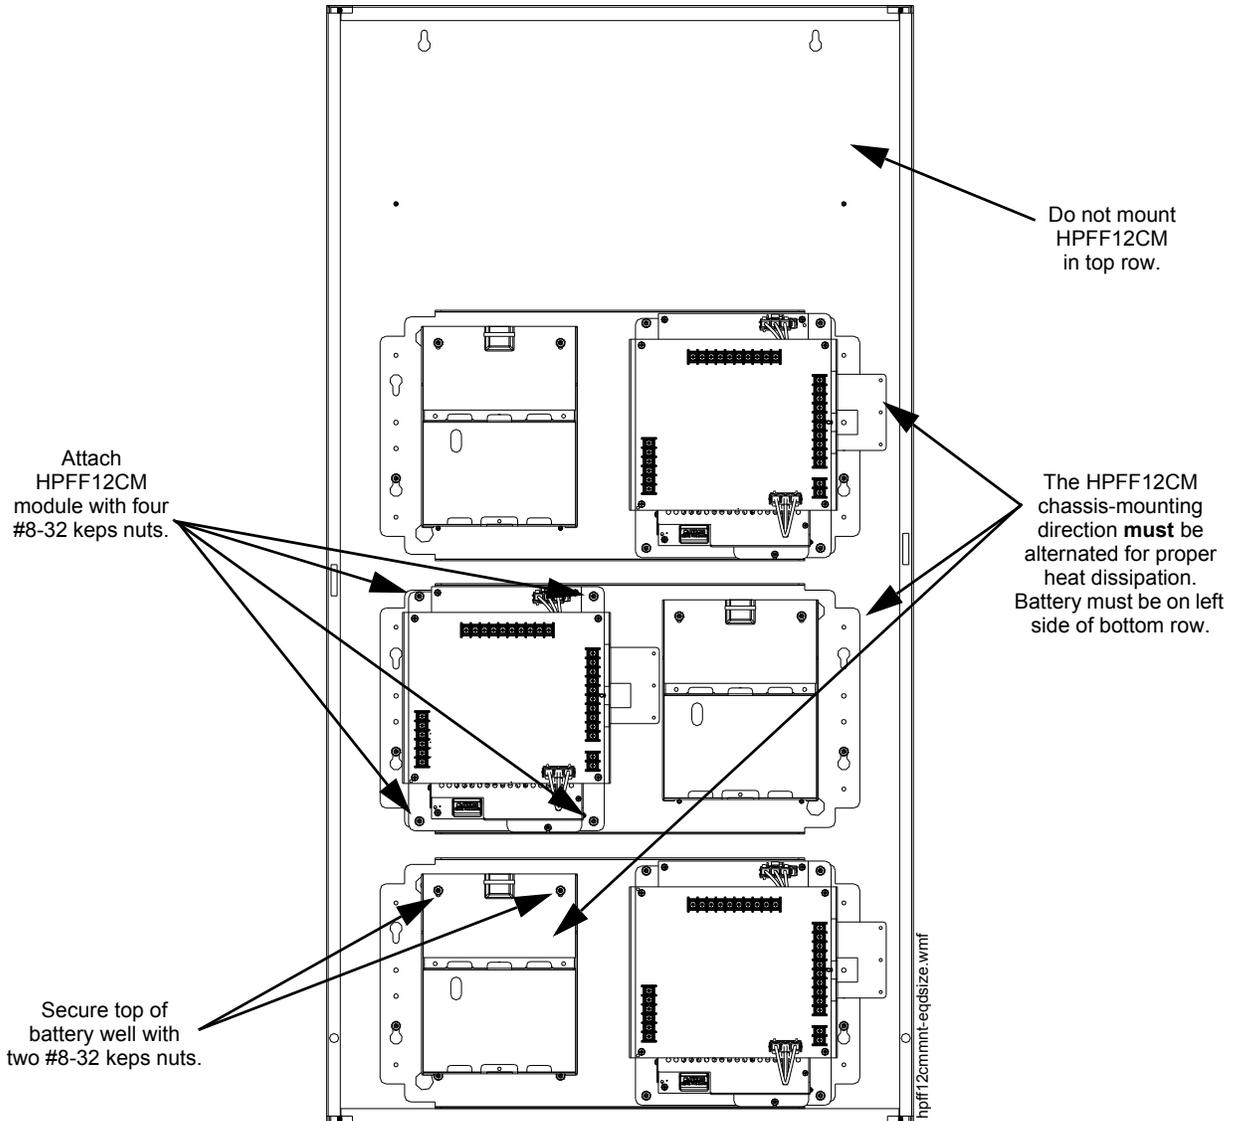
HPFF12CM: Chassis-Mounting in Backbox (EQBB-D4 Shown)
